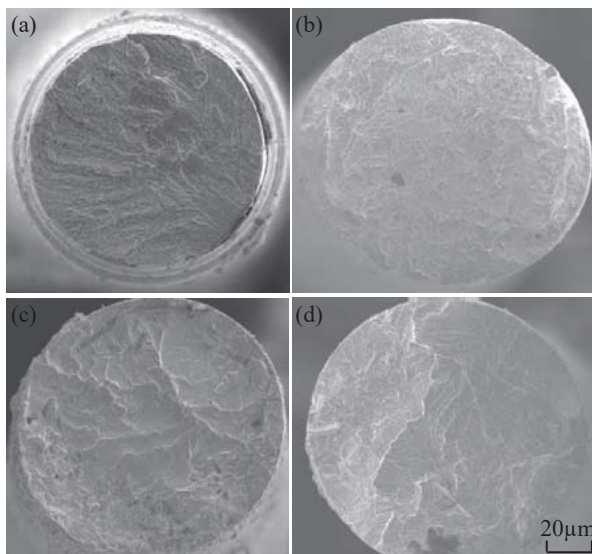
SEM photographs showing fracture surfaces of the joints welded with insert Pd for: (a) J7, (b) J8, (c) J16 and (d) J19.
